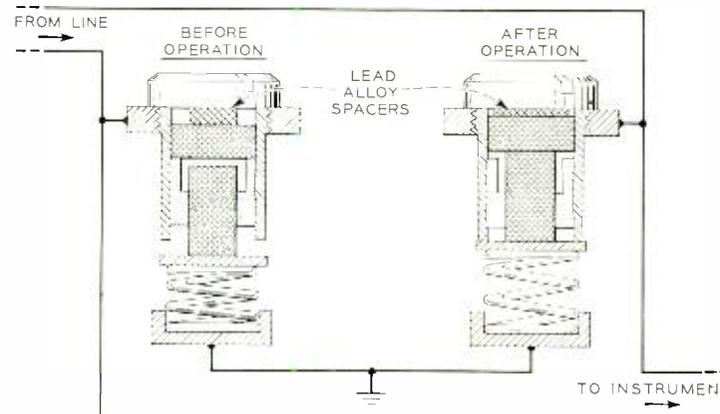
Operation of the 111A protector — the alloy spacer melts and causes metal-to-metal contact between spring assembly and cap.
